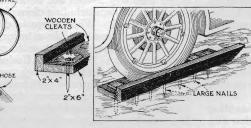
A cleated and spiked board, with a guide rim along one edge, will help in getting your automobile out of mudholes
